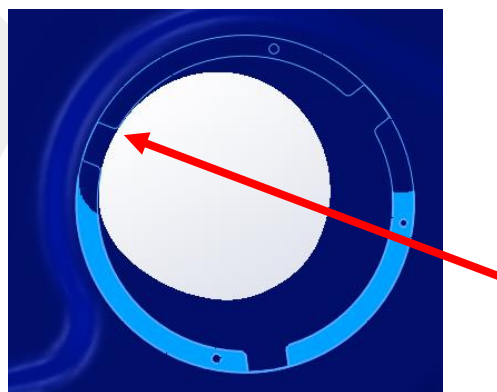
The location of the expanded hole and motor connection cut out locations
